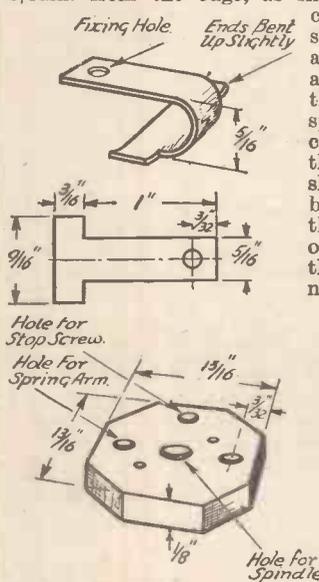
The ebonite centre-block with all dimensions, and the spring arms.
